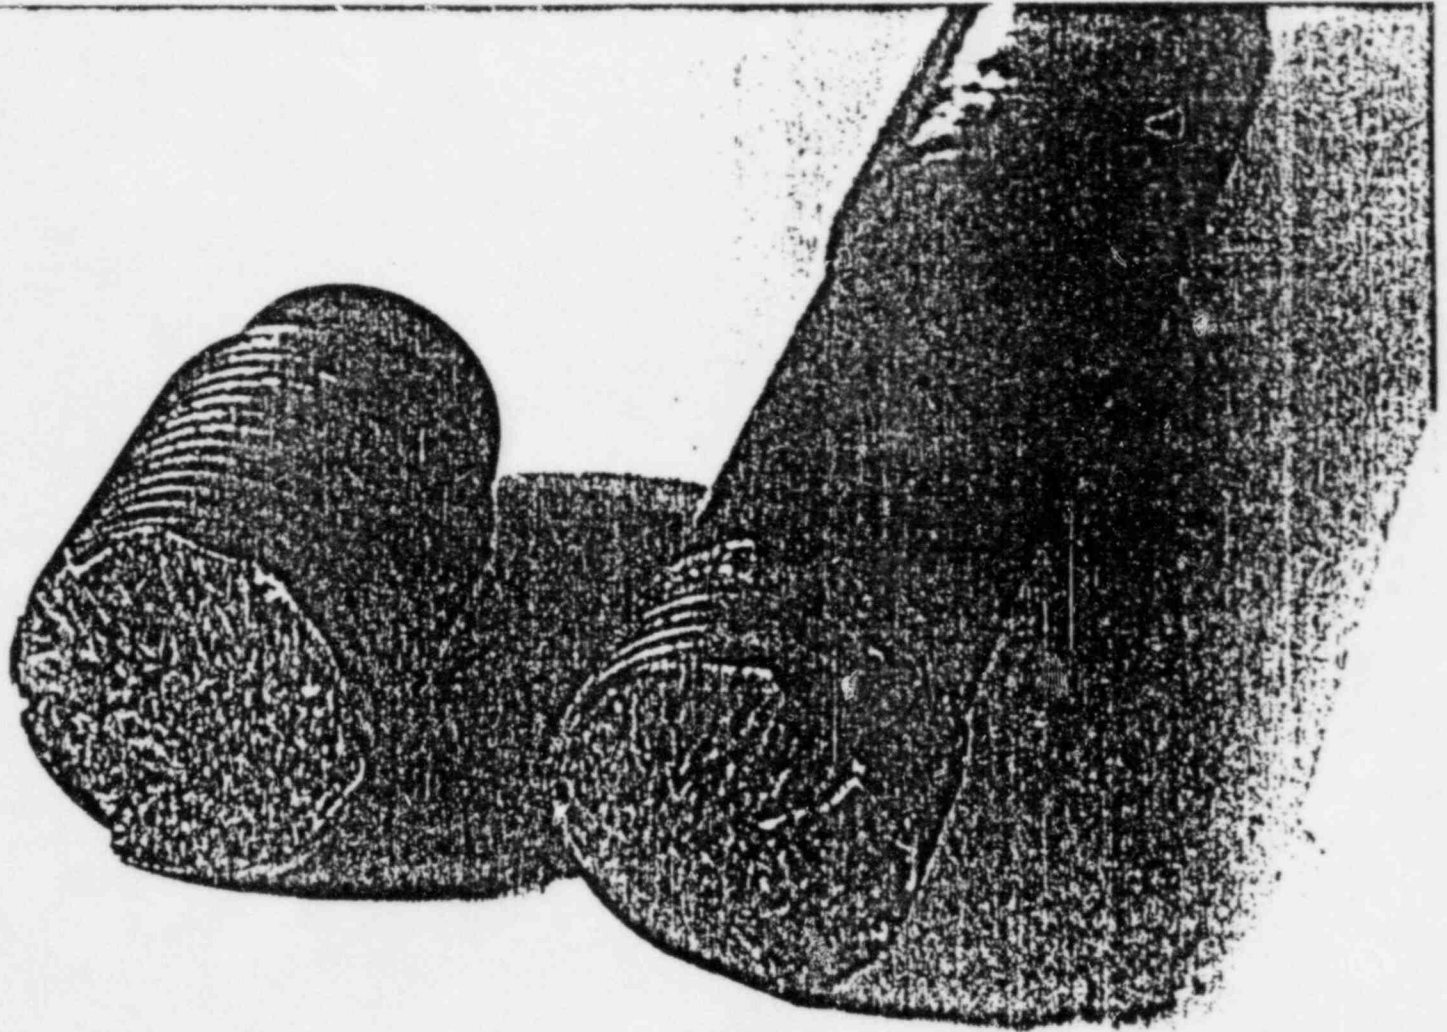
Frontal photograph of the fracture faces of the cracked bolt.
